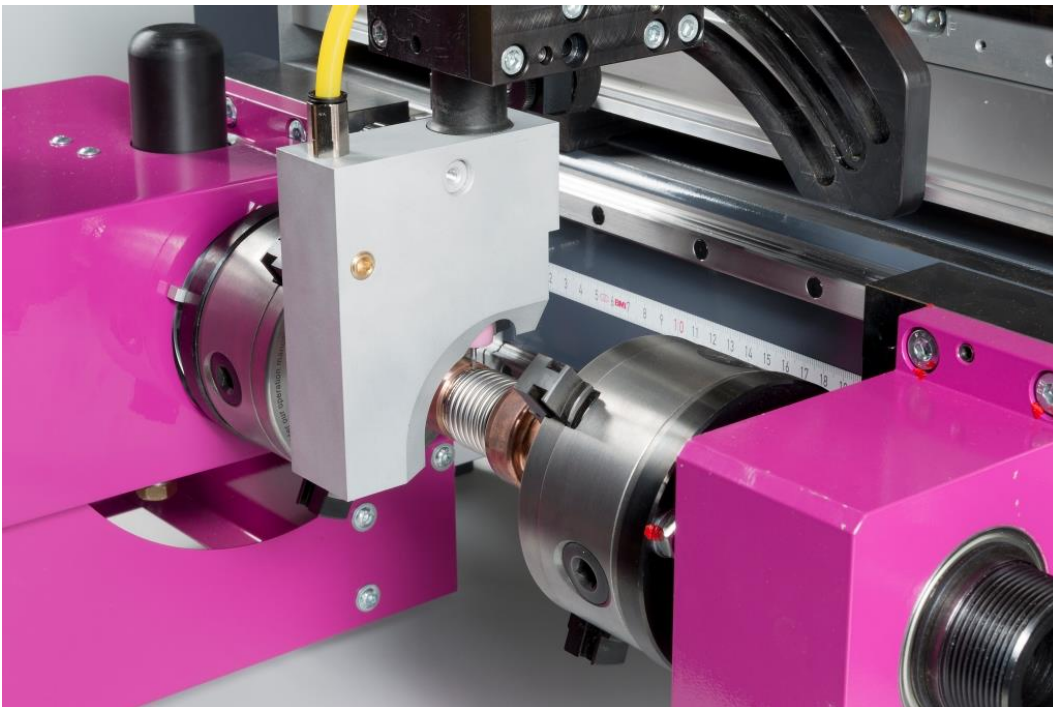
Circumferential seam welding with special trailing gas shield
